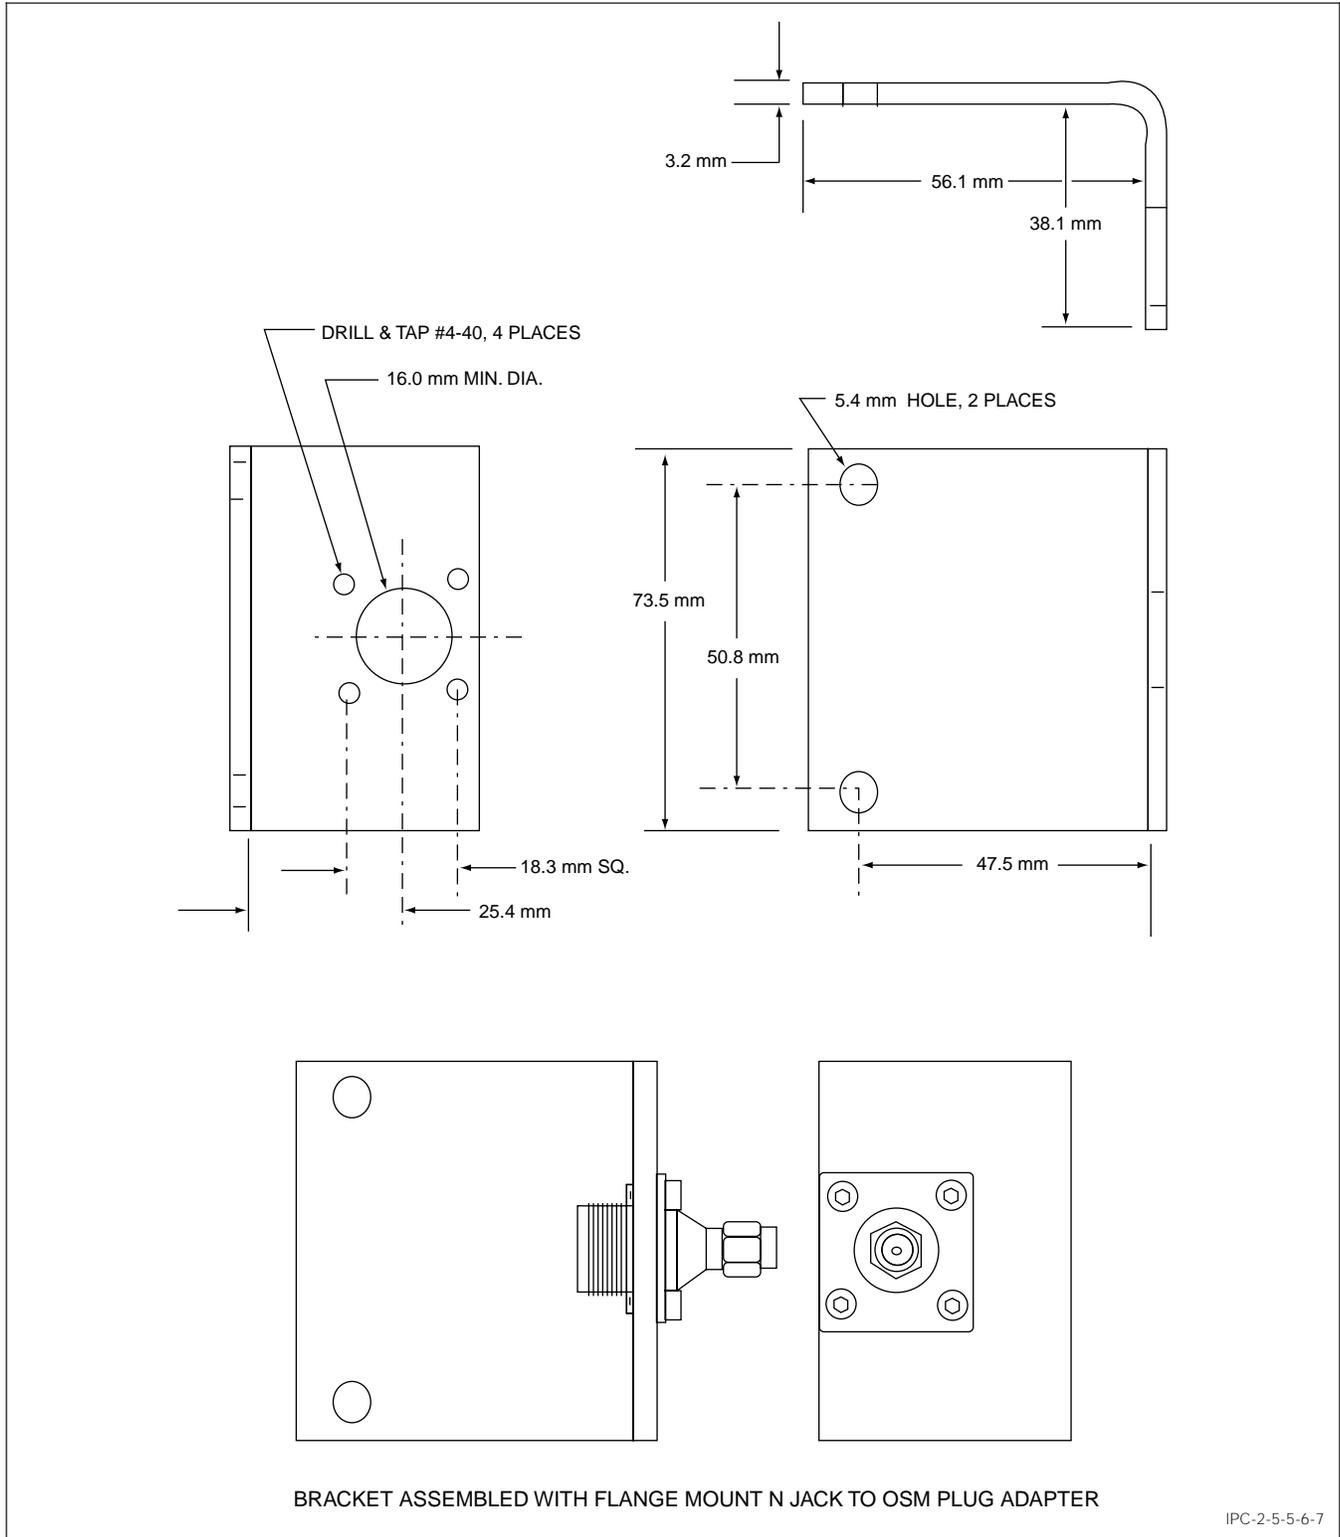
Details of Bracket for Mounting the Flange Mount Adapter
